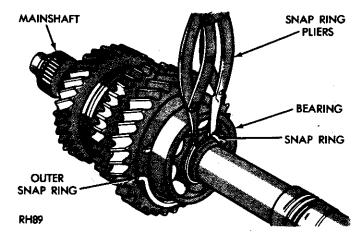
Removing/Installing Rear Bearing Snap Ring
